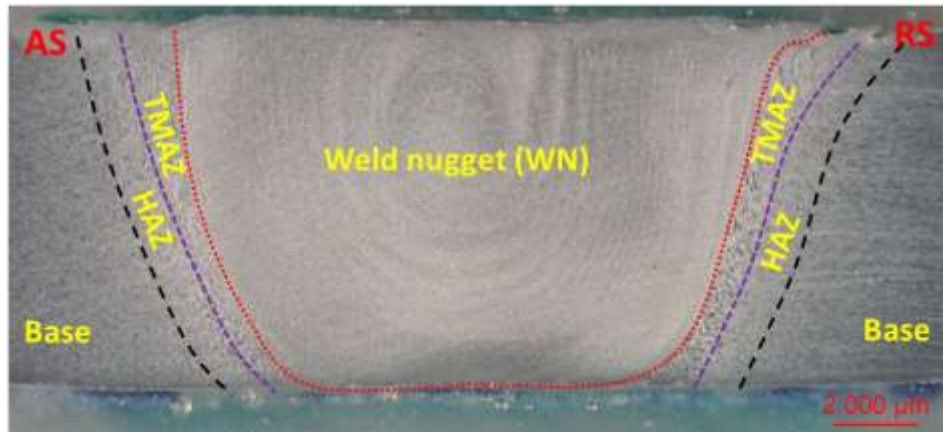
Cross-sectional view of FS welded joint. A FSW joint is composed of SZ, TMAZ, HAZ, and base metal.
